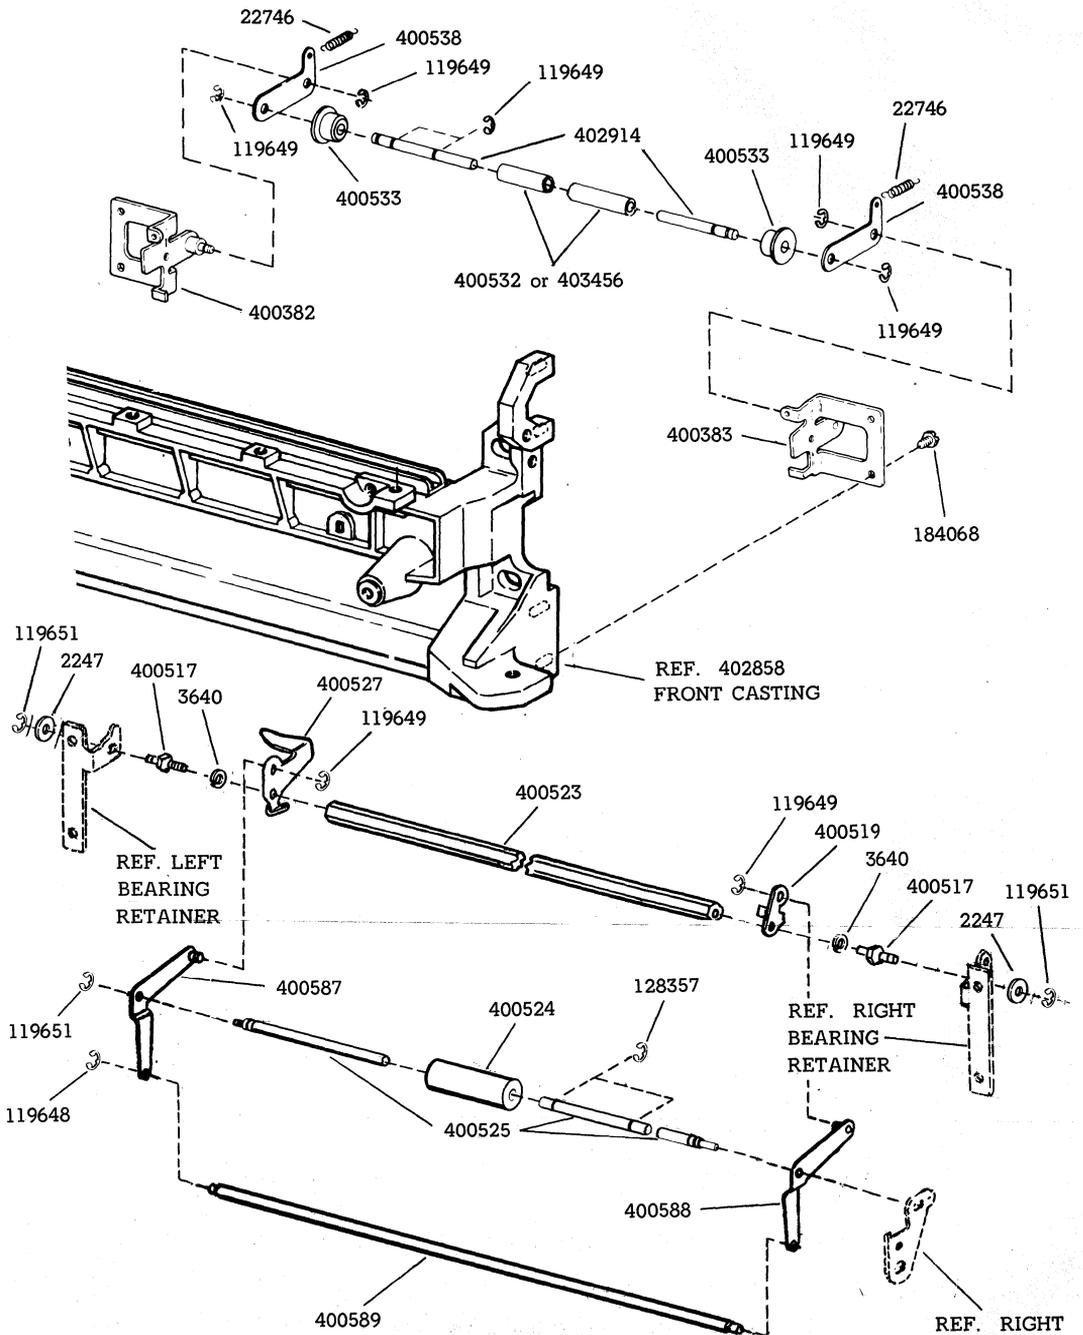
Front Casting Assembly (Friction Feed 40P101 Late Design) (Cont.)
